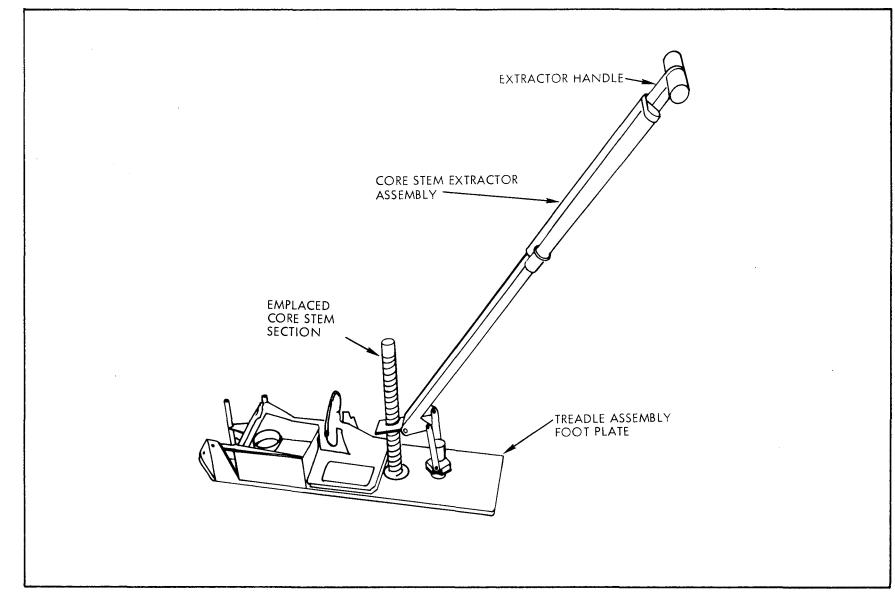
(g). Apollo Lunar Surface Drill Assembly - Treadle/Core Stem Extractor Detail
